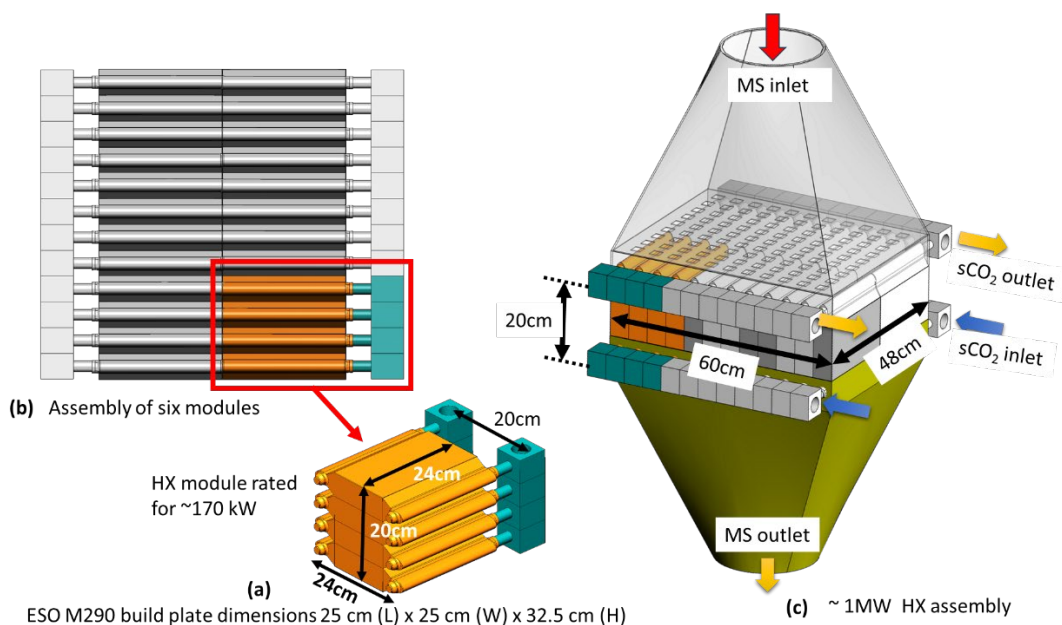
Schematic of a multi-module 1 MW HE (a) dimension of the HE module that can be built in an EOS M290 machine, (b) cross-sectional view of a 6 module HE, and (c) isometric view of the multi-module HE.
